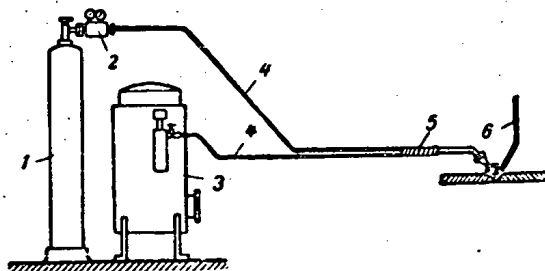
Schematic Set up of an Oxy-Acetylene Welding Plant.
